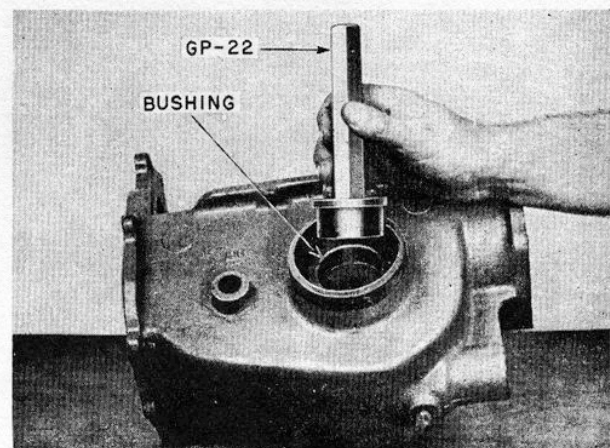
REMOVING TRANSMISSION SPEED GEAR BUSHING
